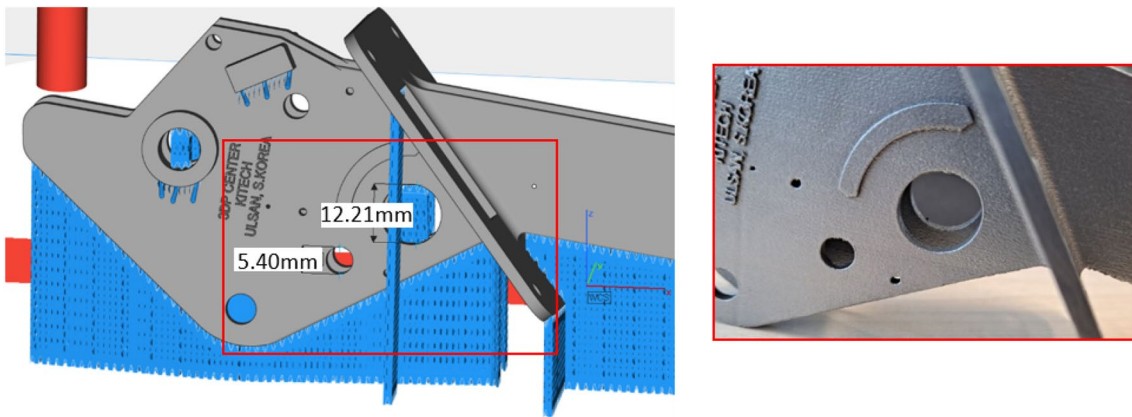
FS (holes) with and without supports illustrated with actual printed c-plate
